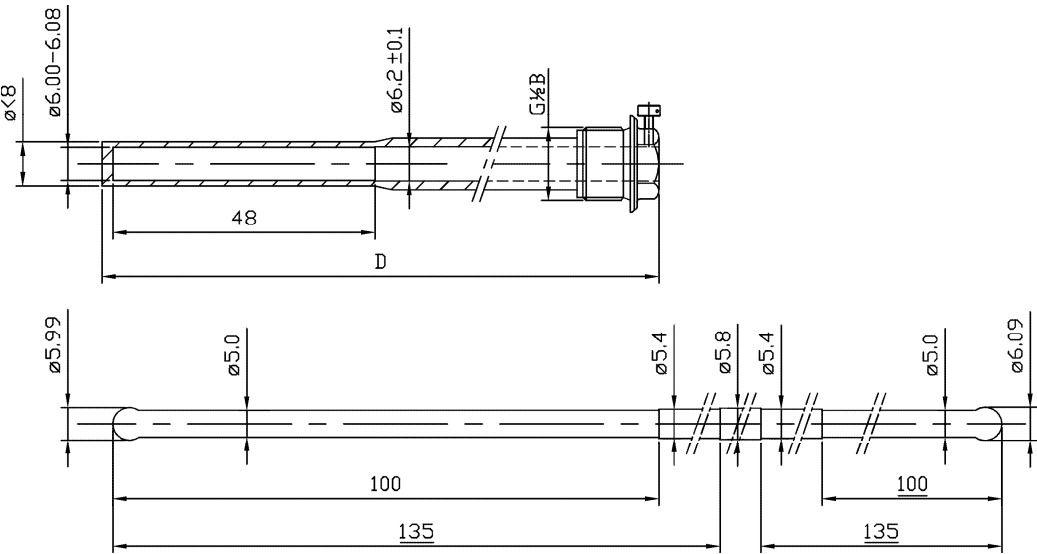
Suggested dimensions of gauge shown together with a pocket
